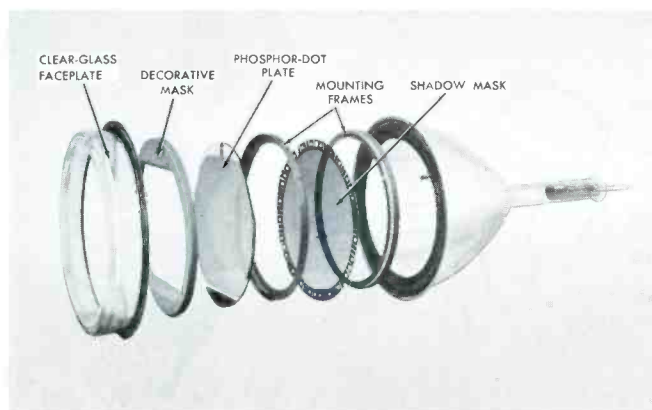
Parts Used in an Early Commercial Color Picture Tube
